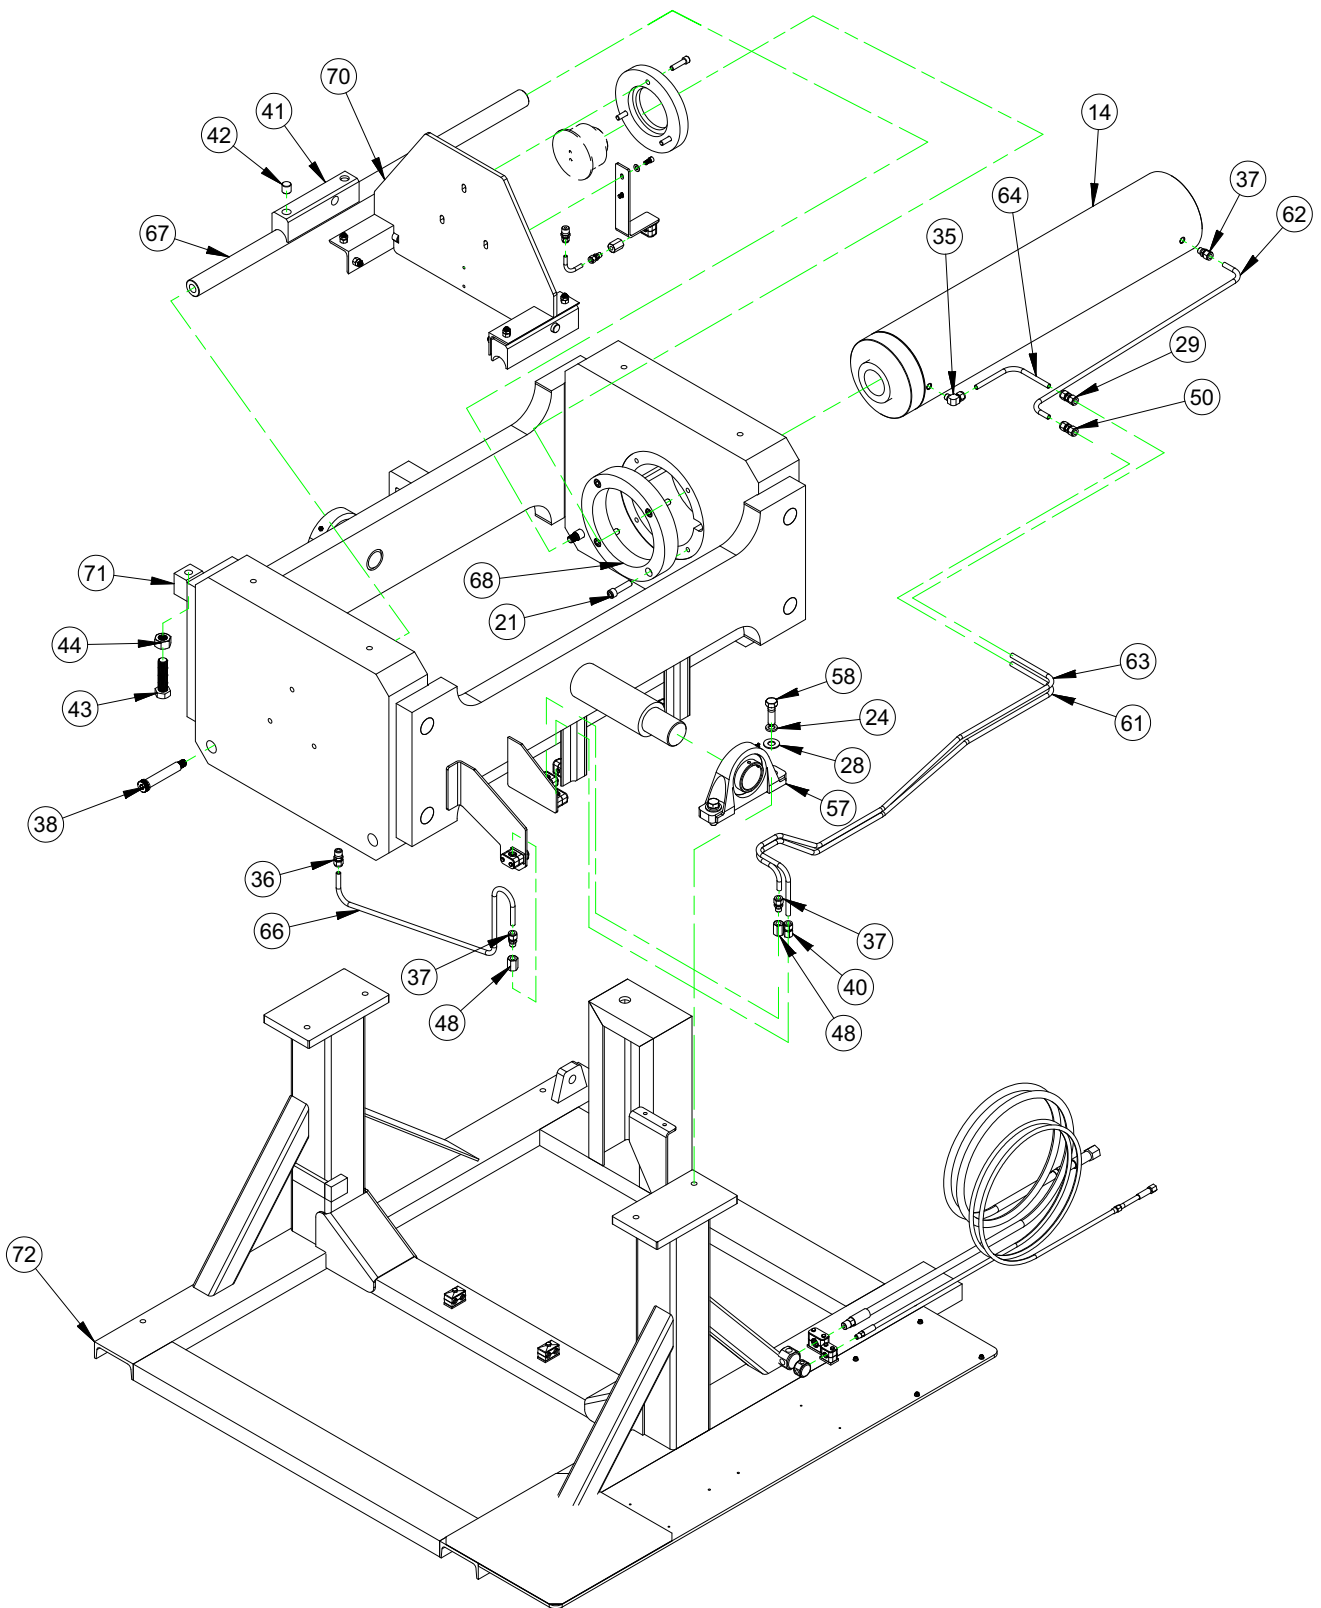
USV-16-200T ASSEMBLY (P/N 91593)
